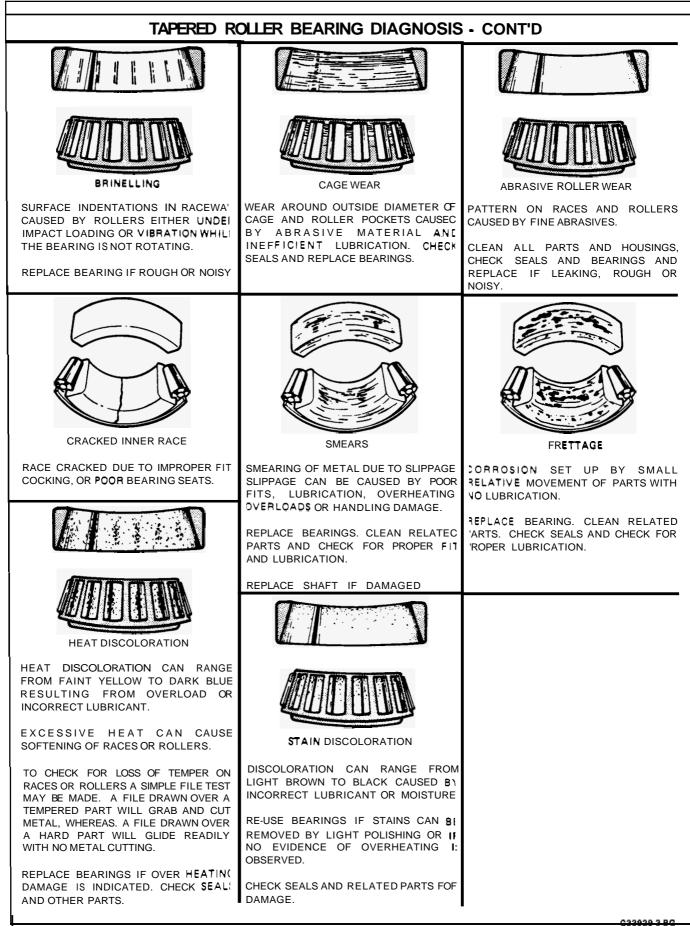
Tapered Roller Bearing Diagnosis (1 of 2)
